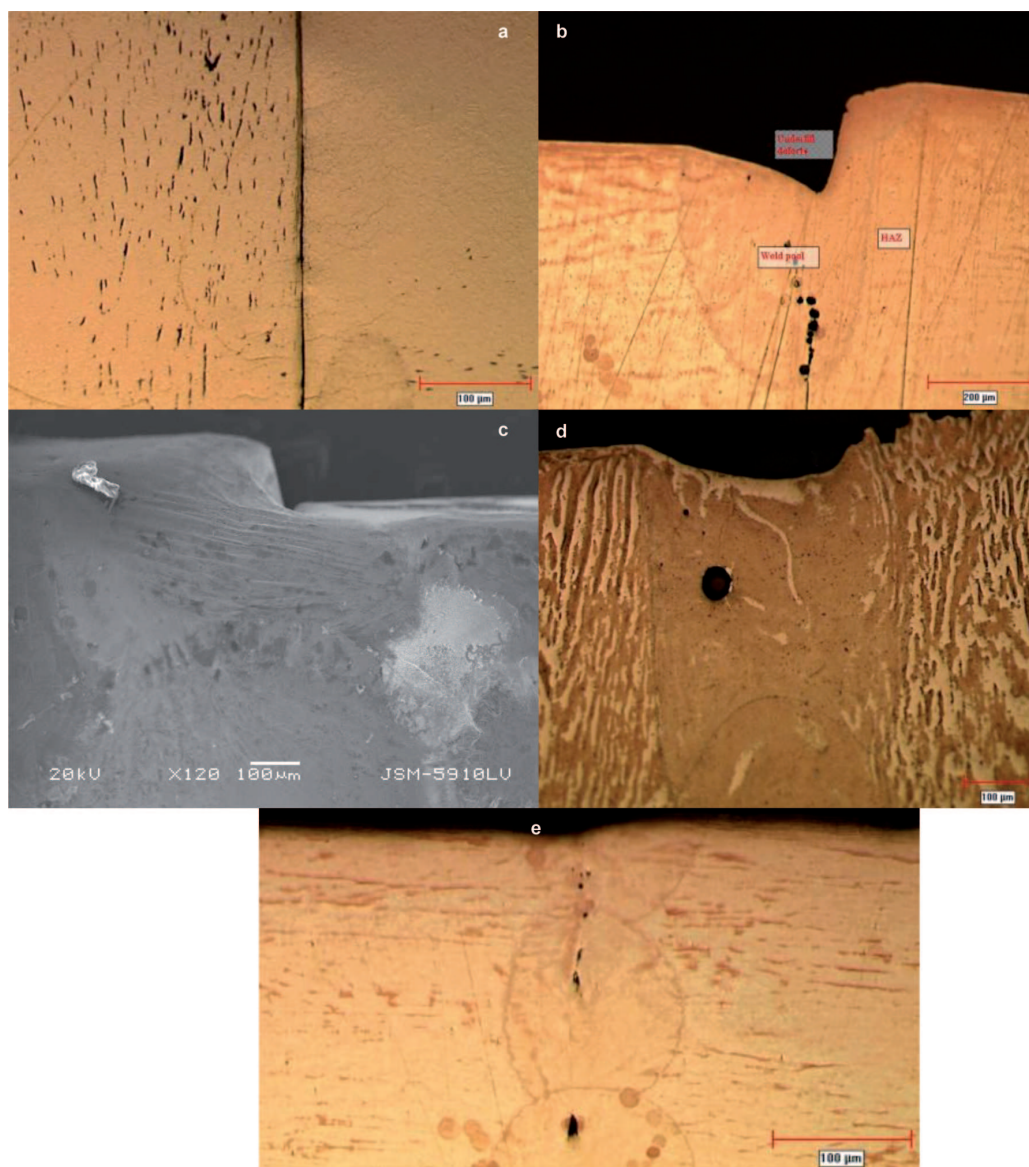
9 ct ata micrographs: a) workpiece 1 b) workpiece 5 c) workpiece 6 d) workpiece 3 e) workpiece 2
